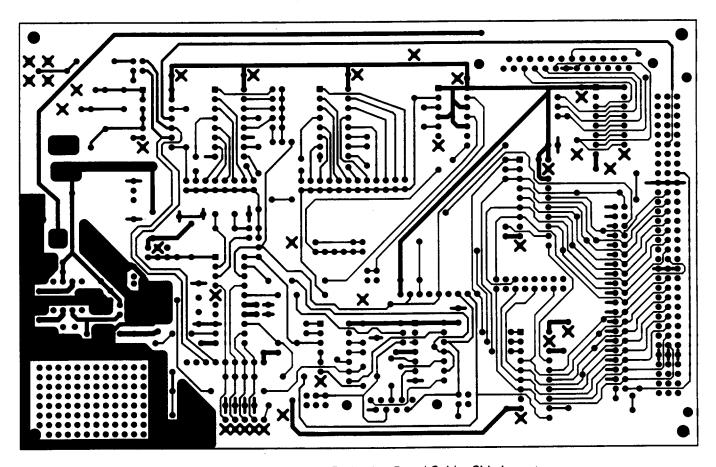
AD7701/AD7703 Evaluation Board Solder Side Layout
